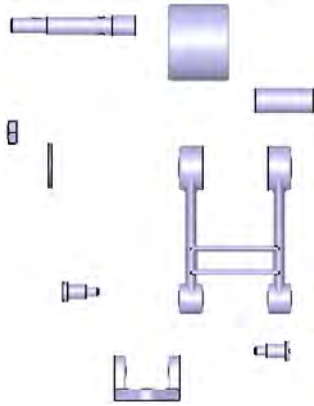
Front view of the exploded Belt Tightener assembly exploded using the 2D option
